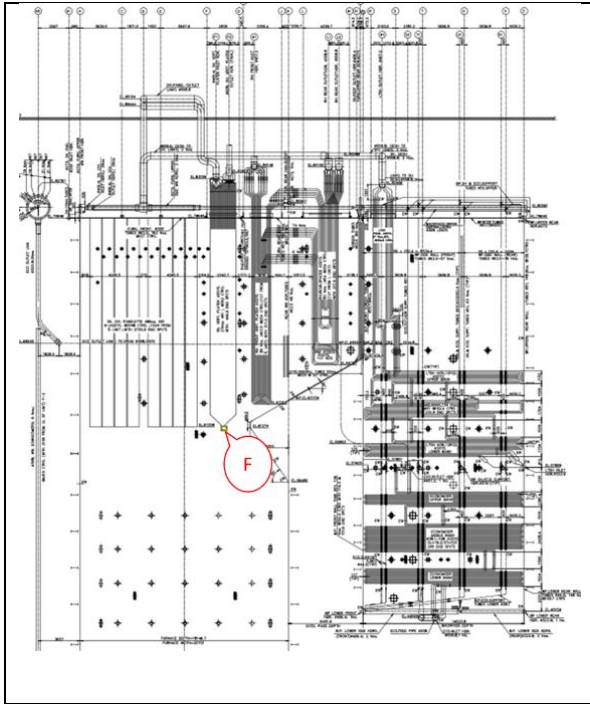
View of the Failed Tube location inside the Boiler tube panel
